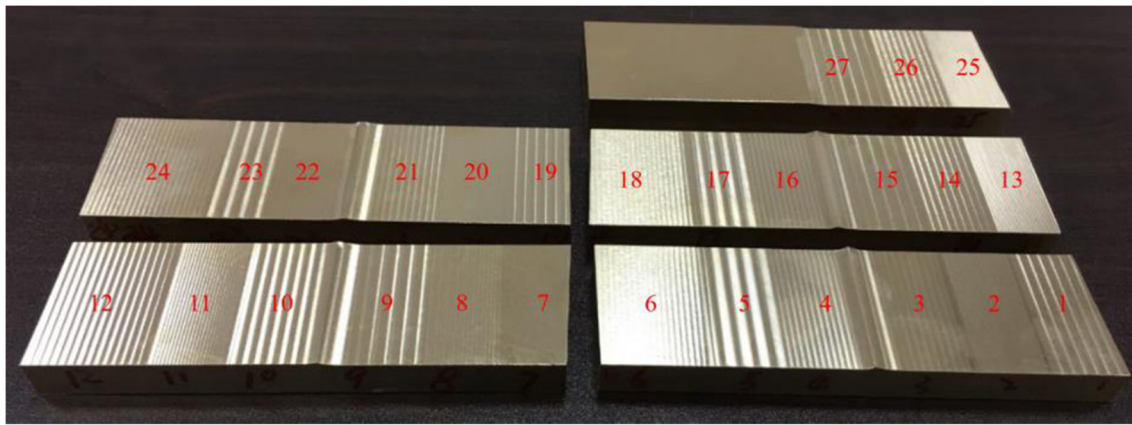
Workpiece machined using the cutting conditions in Table 5
